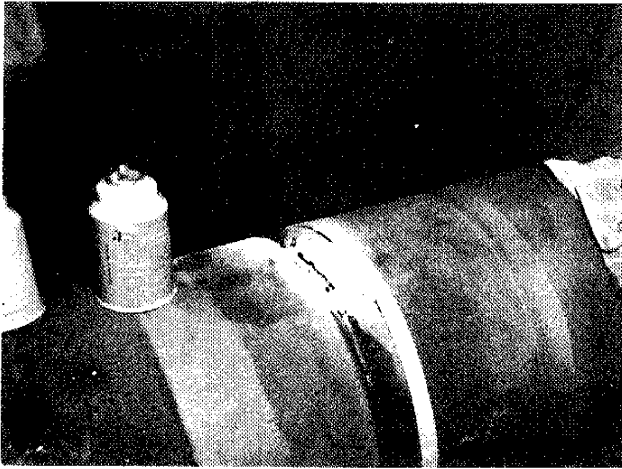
Cracking along weld edge caused by excessive welding stresses when welding without preheat. (Pipe diameter 15 in. by 1 1/4-in. wall).
